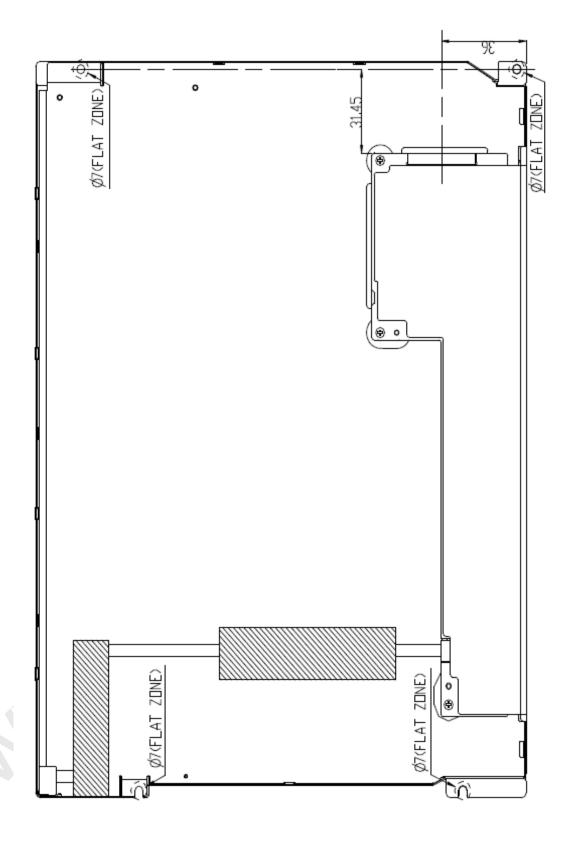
LQ121S1LG88 Outline Drawing (Back Side)
